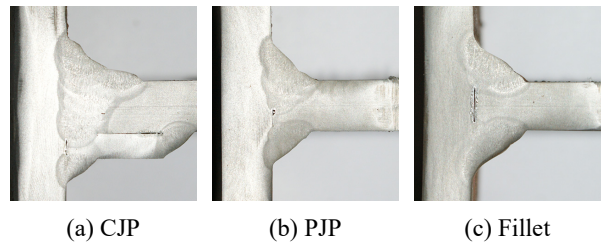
Macroscopic test result of welding detail of diaphragm and column flange
